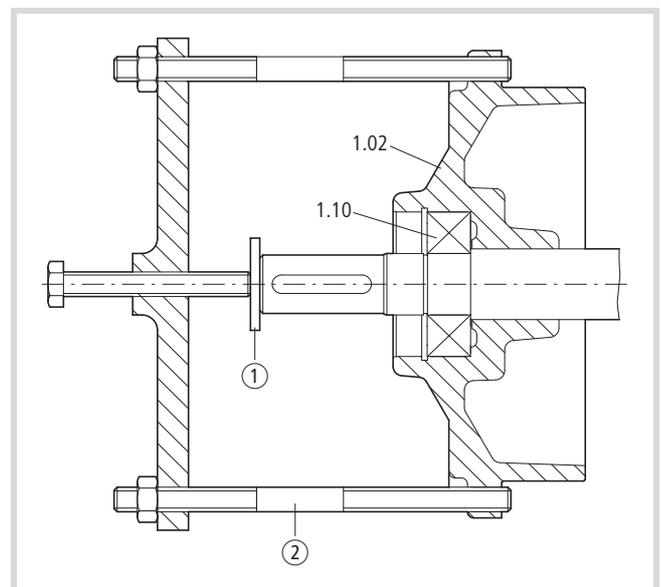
Removing the DE end shield (1.02) and DE roller bearing (1.10) from the shaft
